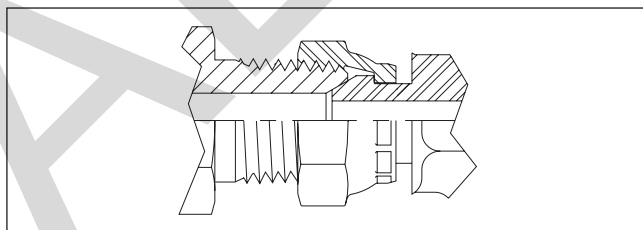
Illustration showing how NPSM swivel adapters seal on mating chamfer in male NPT thread
